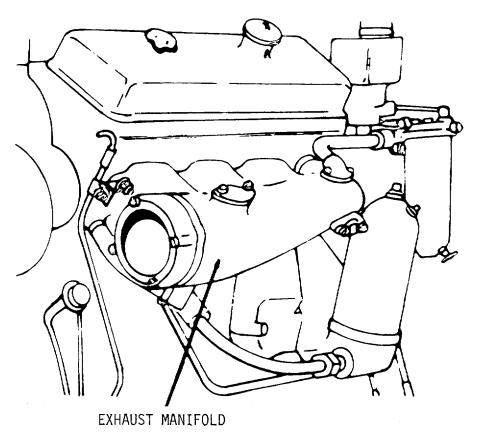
Water-Cooled Exhaust Manifold Mounting.
